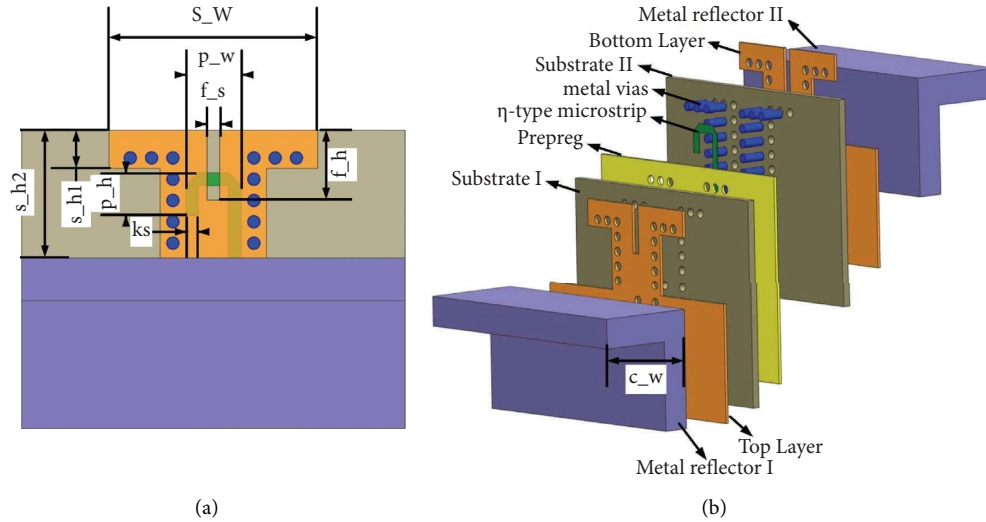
Configuration of antenna element: (a) front view and (b) exploded view.
